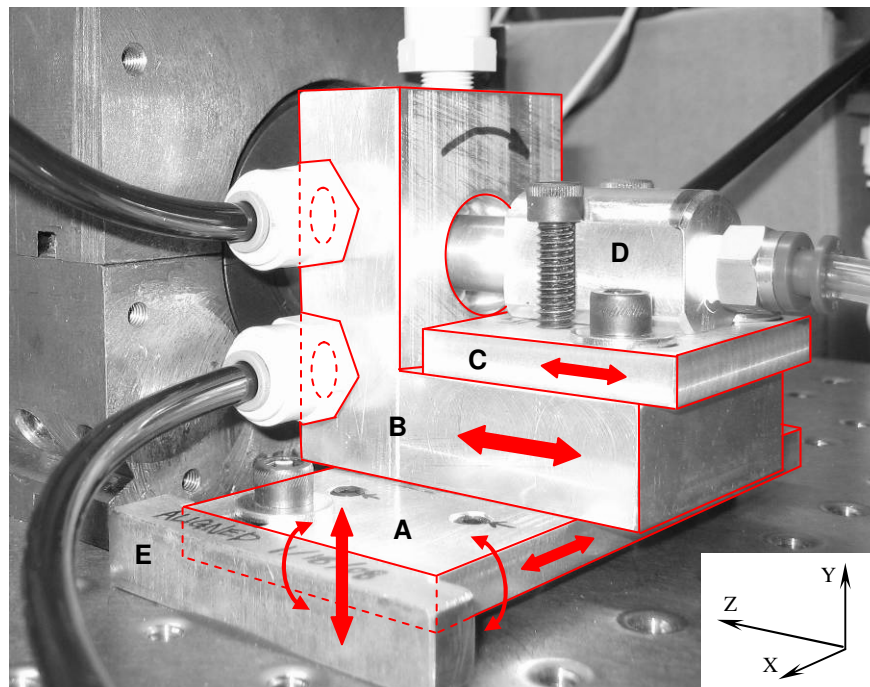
Turbine shroud and thrust nozzle assembly adjustments.
